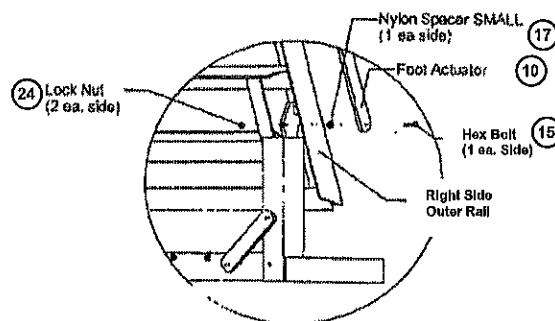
Close-up illustration showing foot actuator connecting to the floor base assembly.
